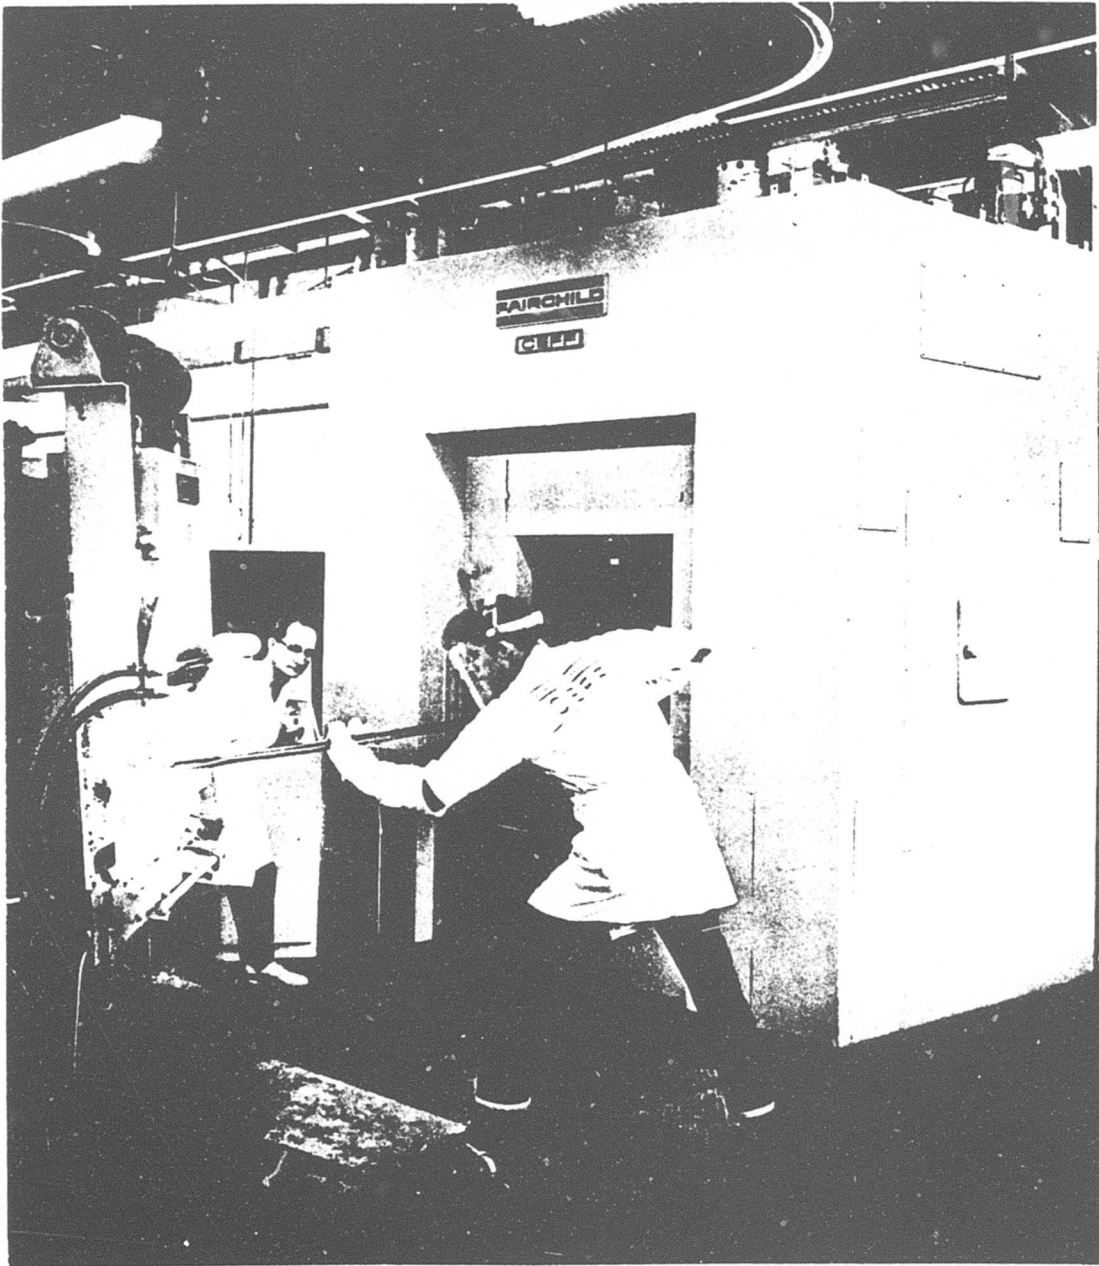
CEFF Machine in Operation - Operator Is Shown Removing Forging Blank From Furnace Preparatory to Placing it Into Die
